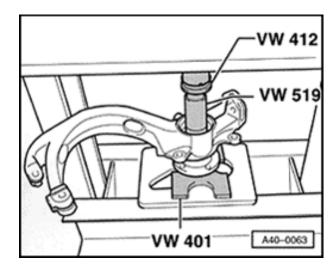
Pressing wheel hub into wheel bearing with 75 mm diameter
